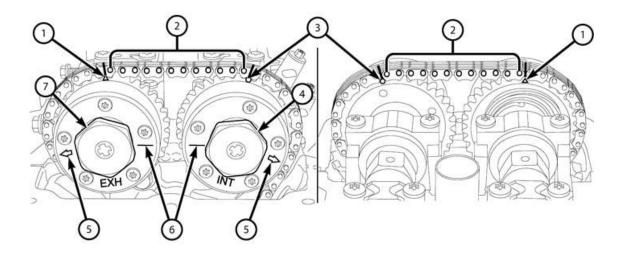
Arrows, Scribe Lines & Cylinder Head Cover Mounting Surface Courtesy of CHRYSLER GROUP, LLC
